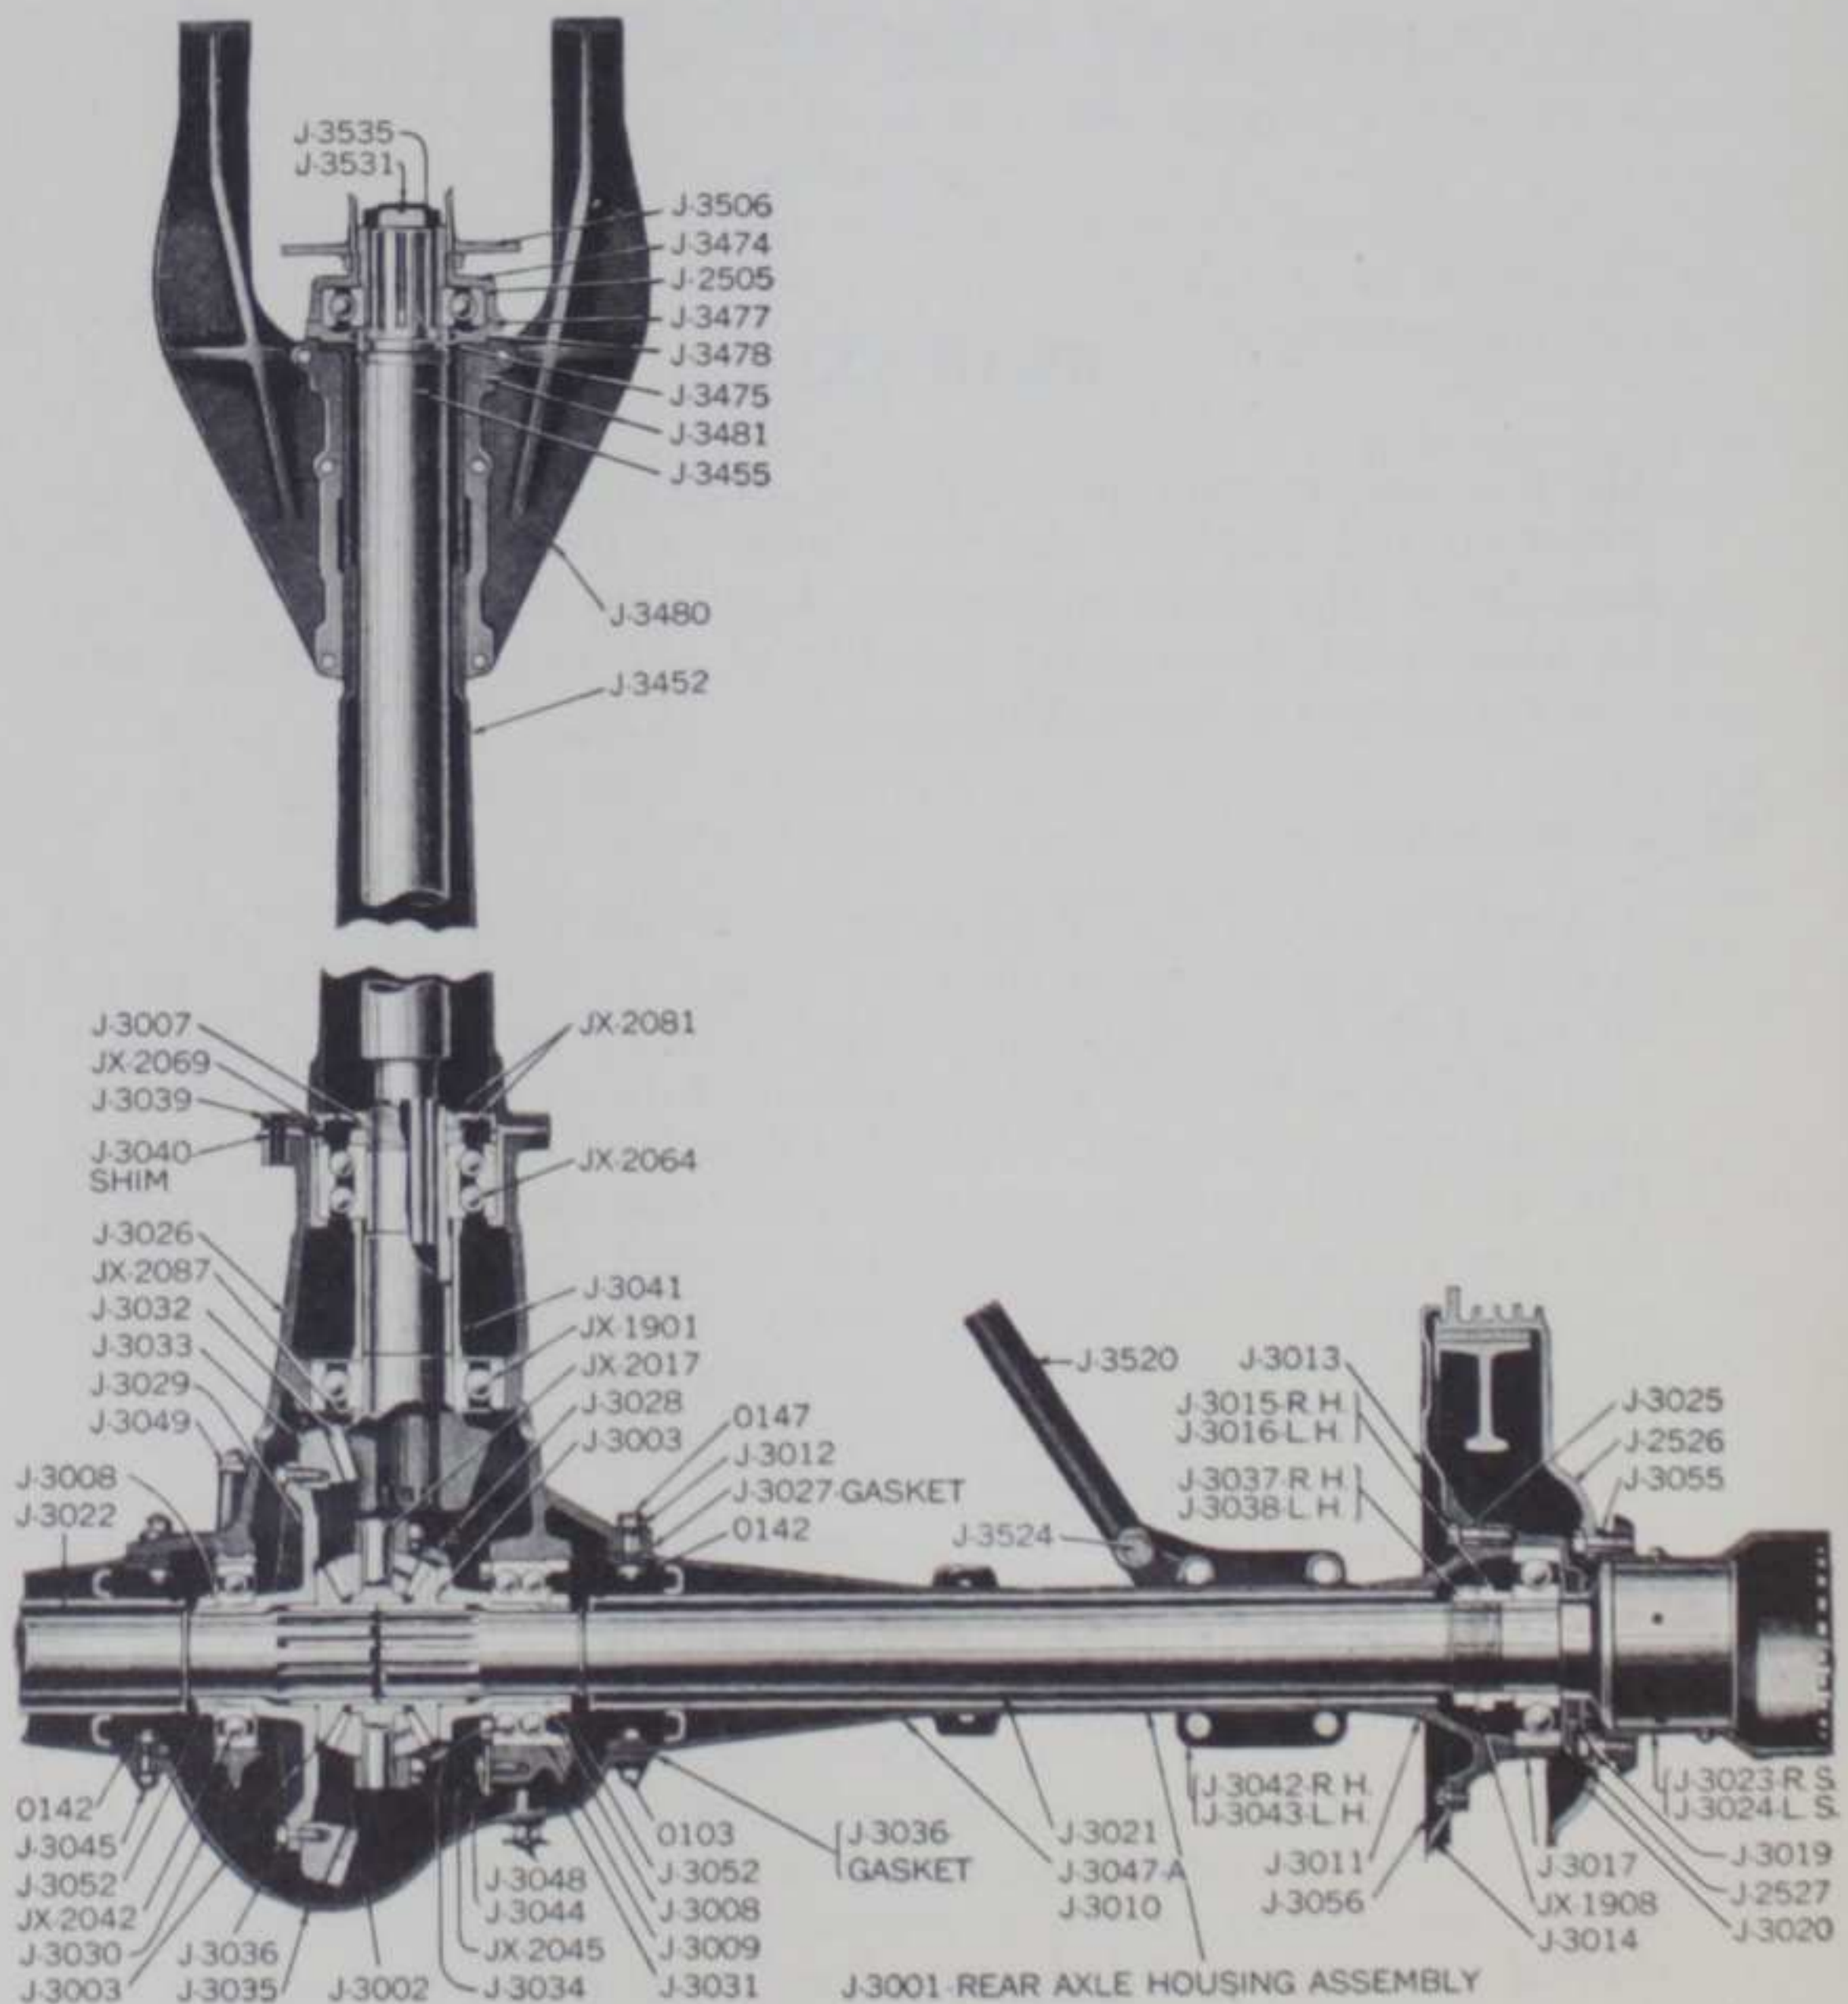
Cross Sectional View Rear Axle and Torque Tube
